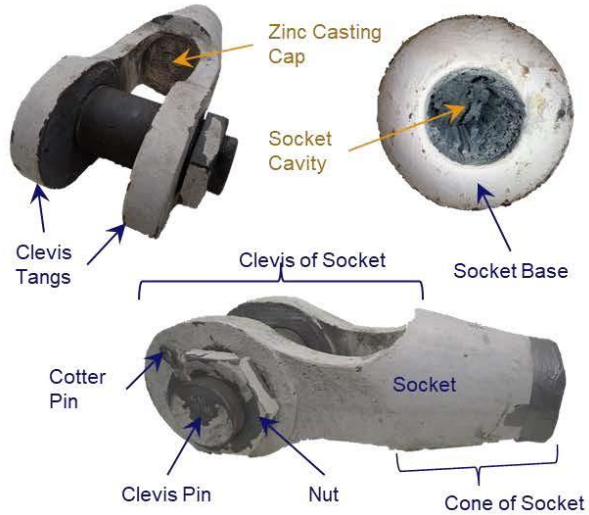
Nomenclature used to describe the parts of the failed spelter socket joint.
